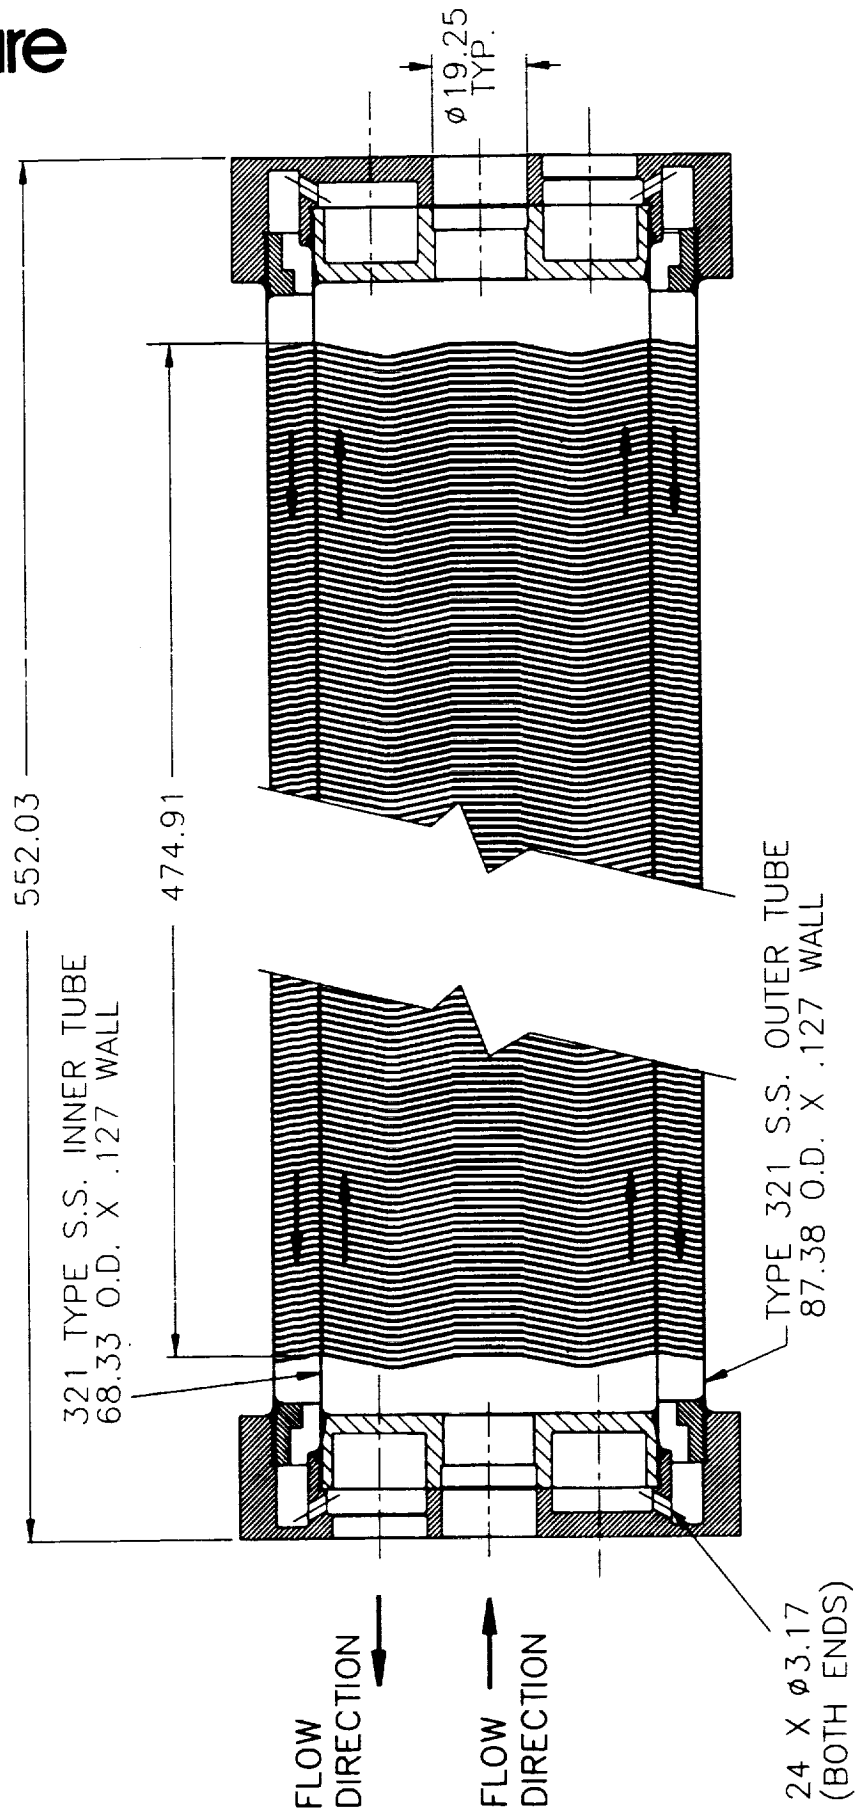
ASSEMBLY OF THE HEAT EXCHANGER
